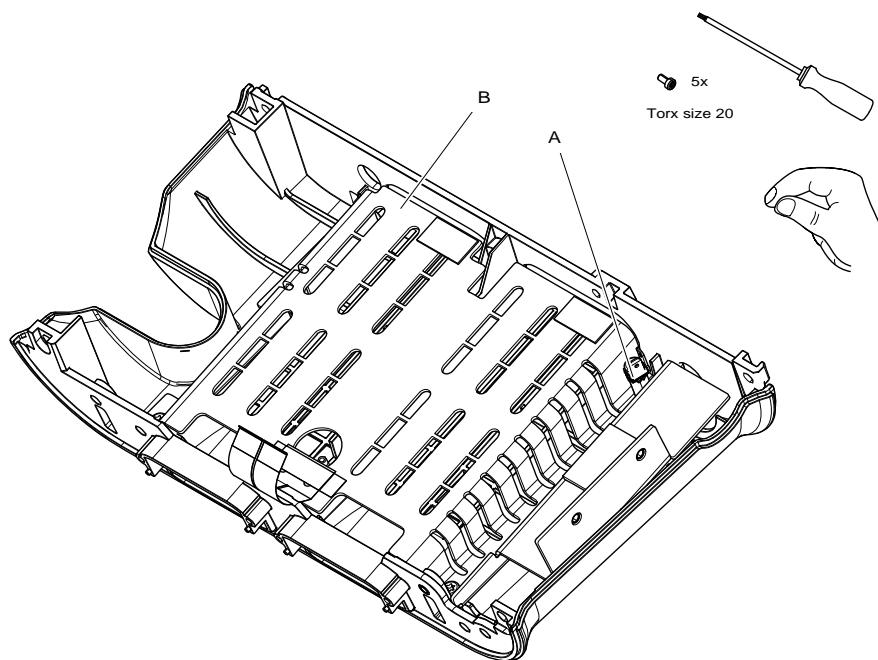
Mounting plate (HAMILTON-C1 < SN1865)
